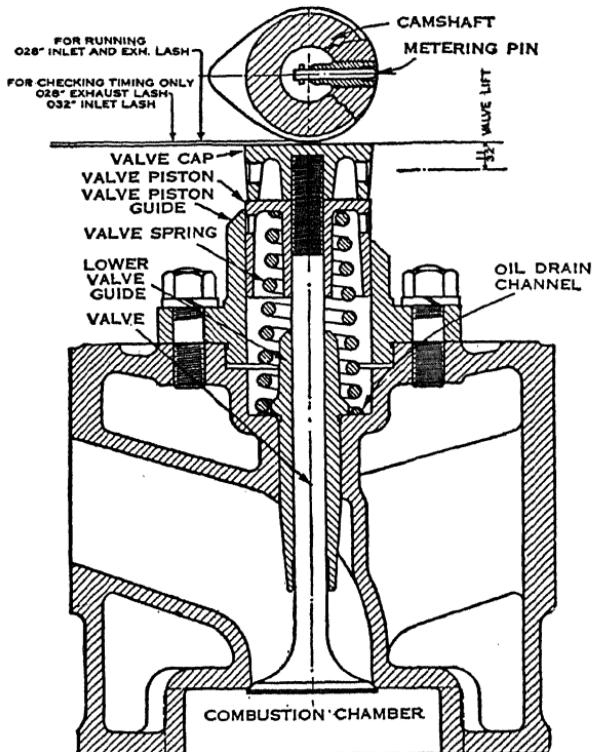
Cross Section through Valve of Overhead Camshaft Engine
